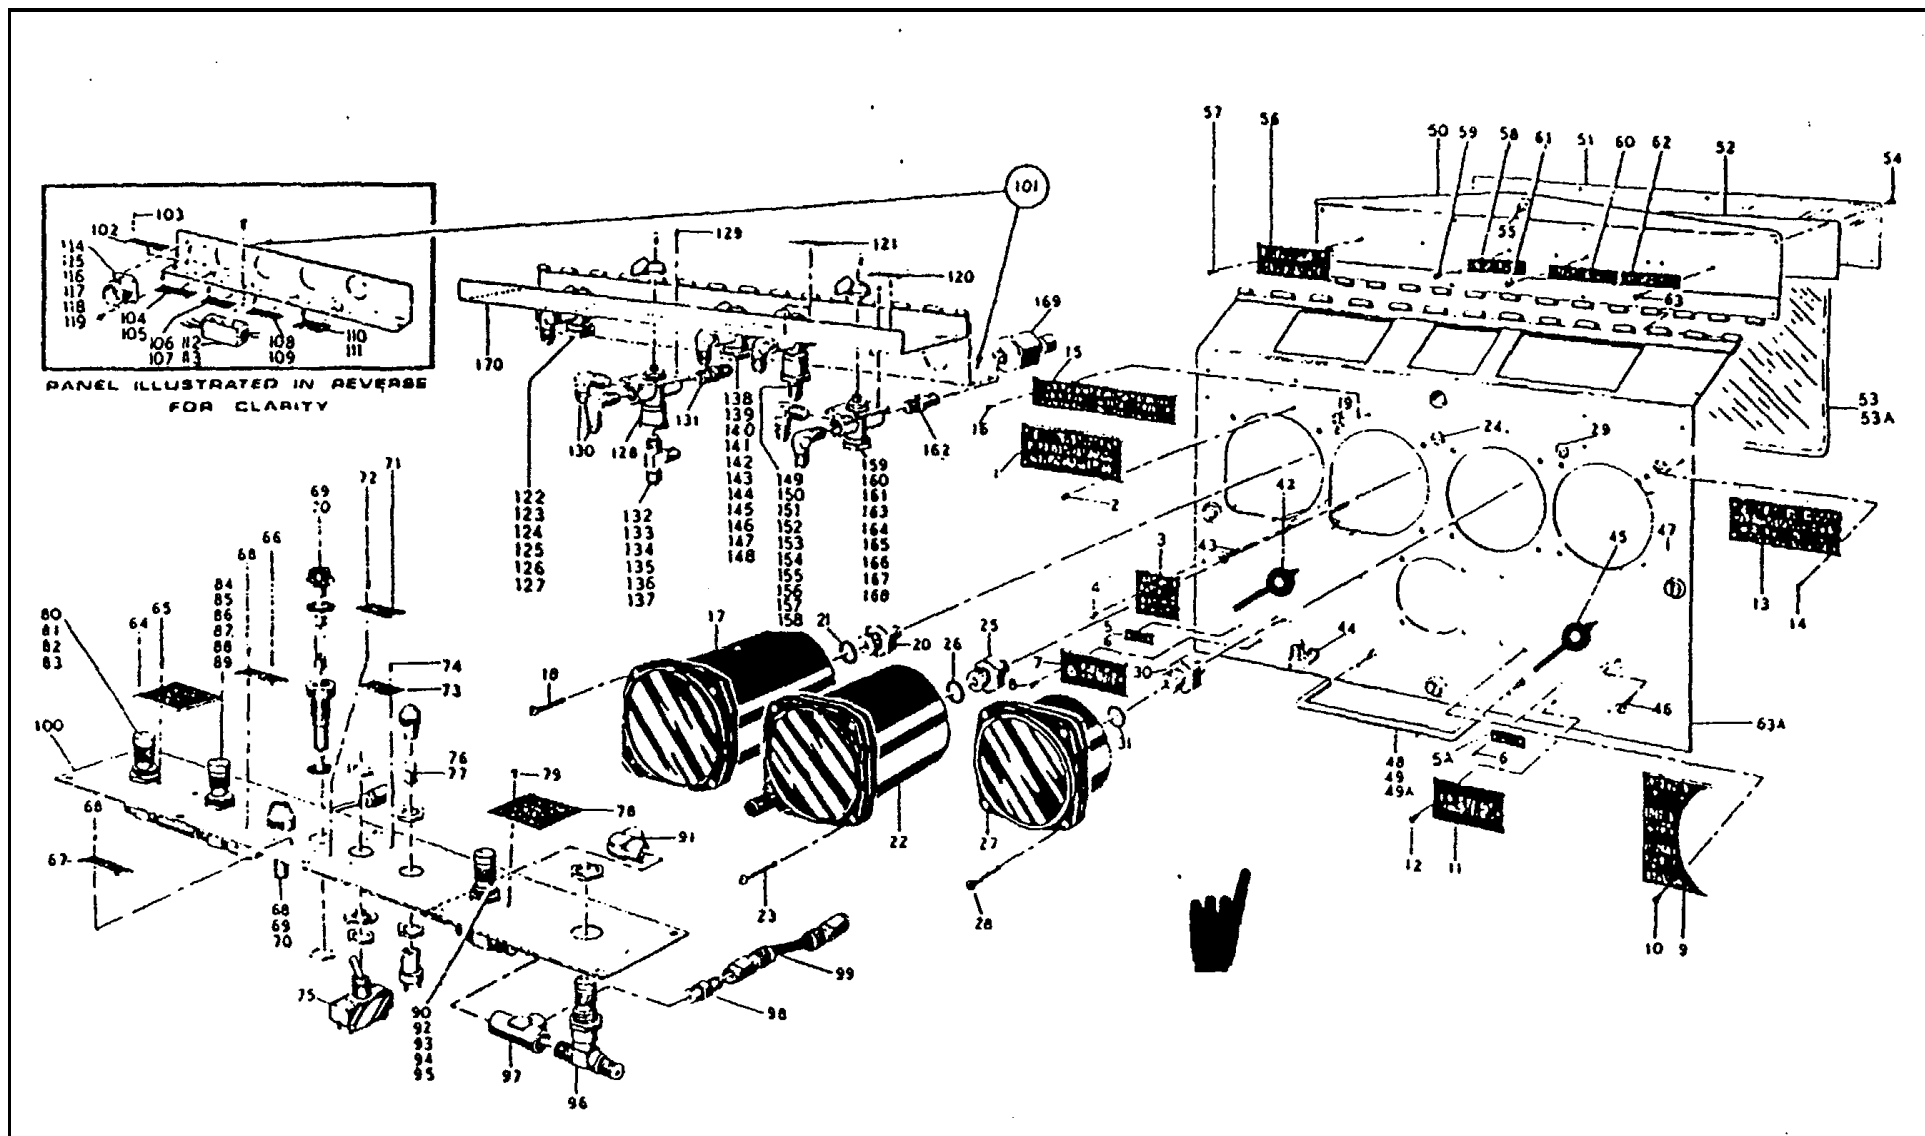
Tester Assembly (Sheet 1 of 2 Sheets)
